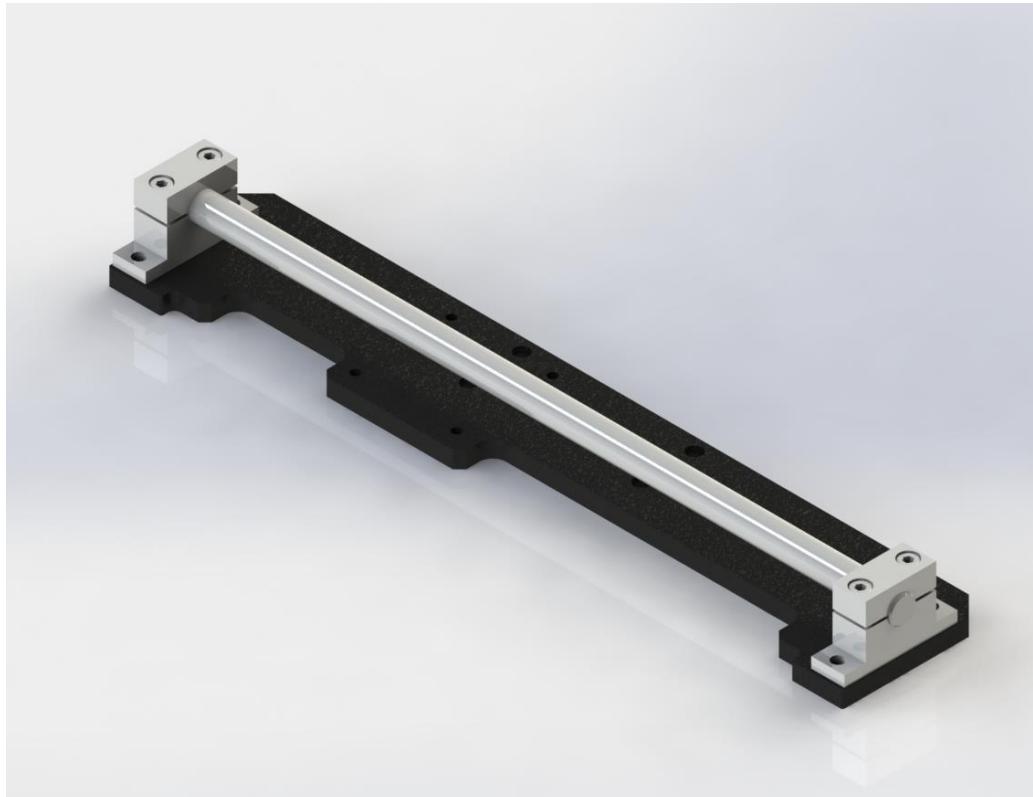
The Cylinder Lift Plate with the guide rod mounted
